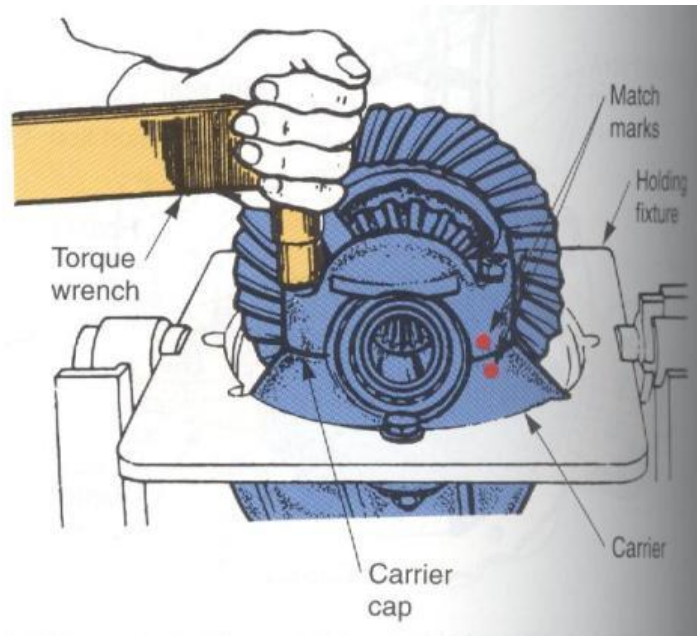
Make sure you align markings during assembly and torque all fasteners to specifications.
